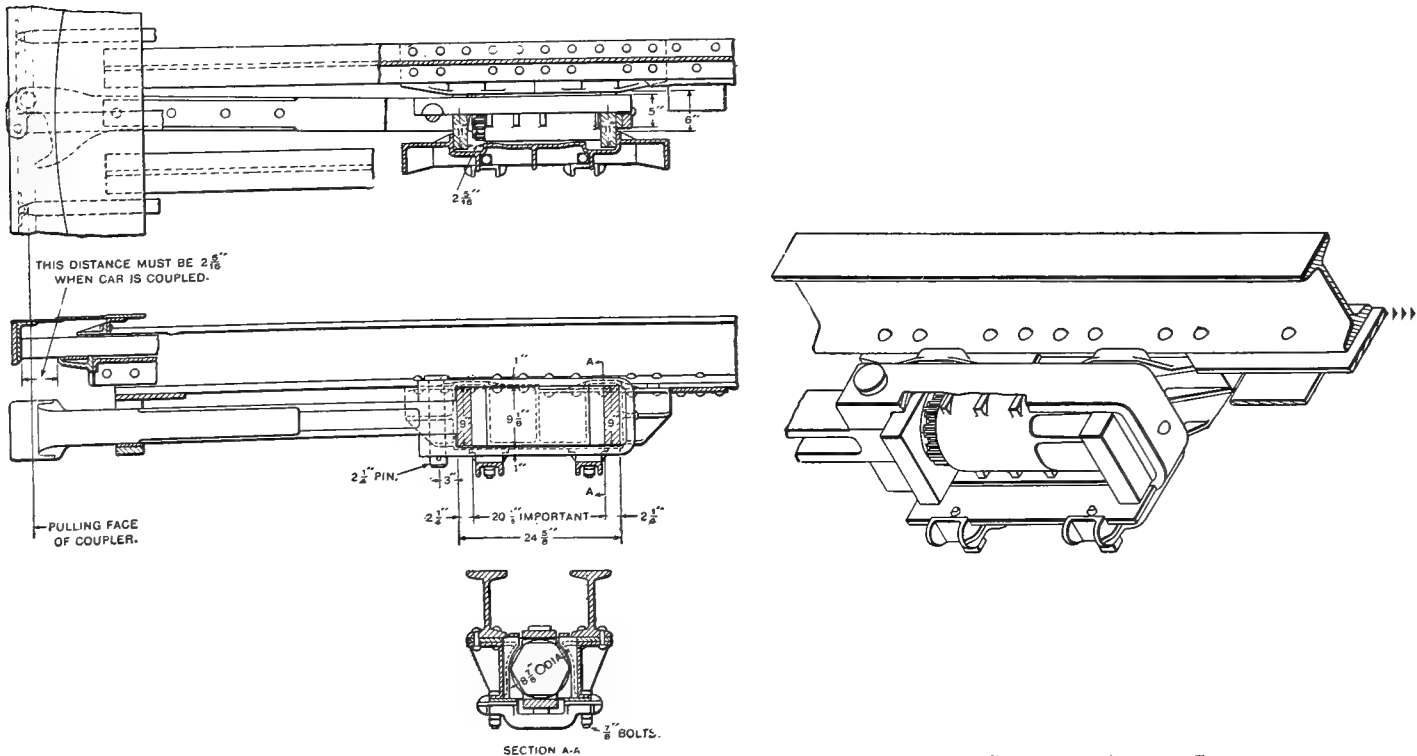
Westinghouse Type D-3 Friction Draft Gear with Universal Draft Gear Attachment Company's Continuous Draft Plates for Passenger Equipment with Standard Steel Platforms. Westinghouse Air Brake Company.
